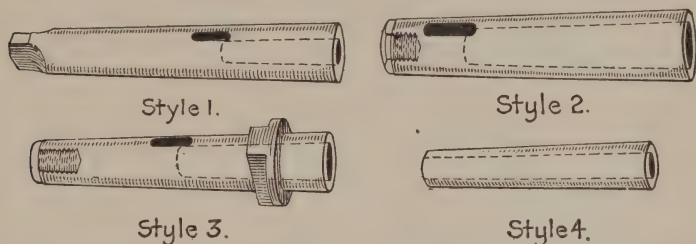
Milling-machine collets. For adapters for standardized spindle end see Fig. 214.
